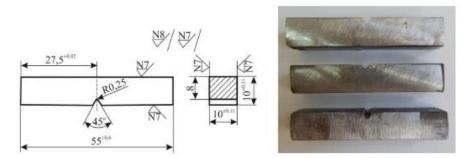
Technical drawing and actual appearance of samples for the impact toughness tests.
